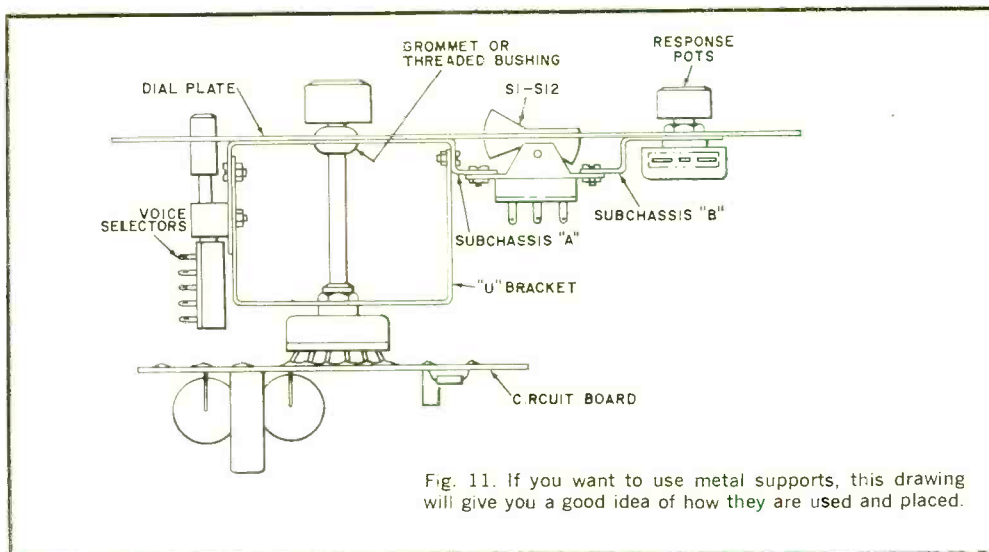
If you want to use metal supports, this drawing will give you a good idea of how they are used and placed.
